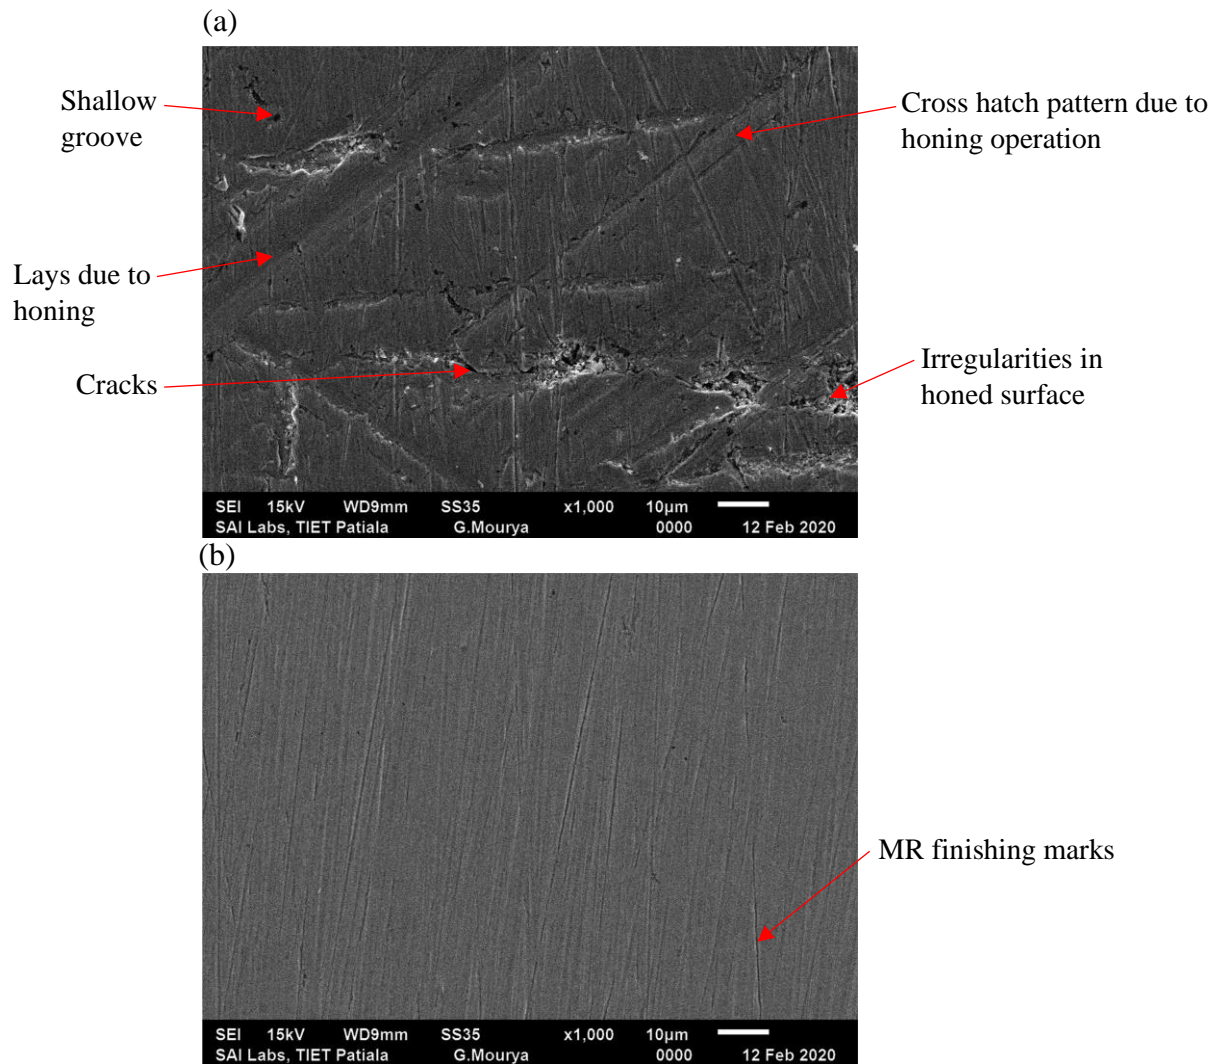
Scanning electron microscopy images on (a) the initial honed surface, and (b) the final MR finished surface of the cylindrical workpiece of EN-31 steel using R-MRH process for 40 min of finishing with the optimized parameters on the 7665 mm² of the internal surface area of the cylindrical workpiece of EN-31 steel.
